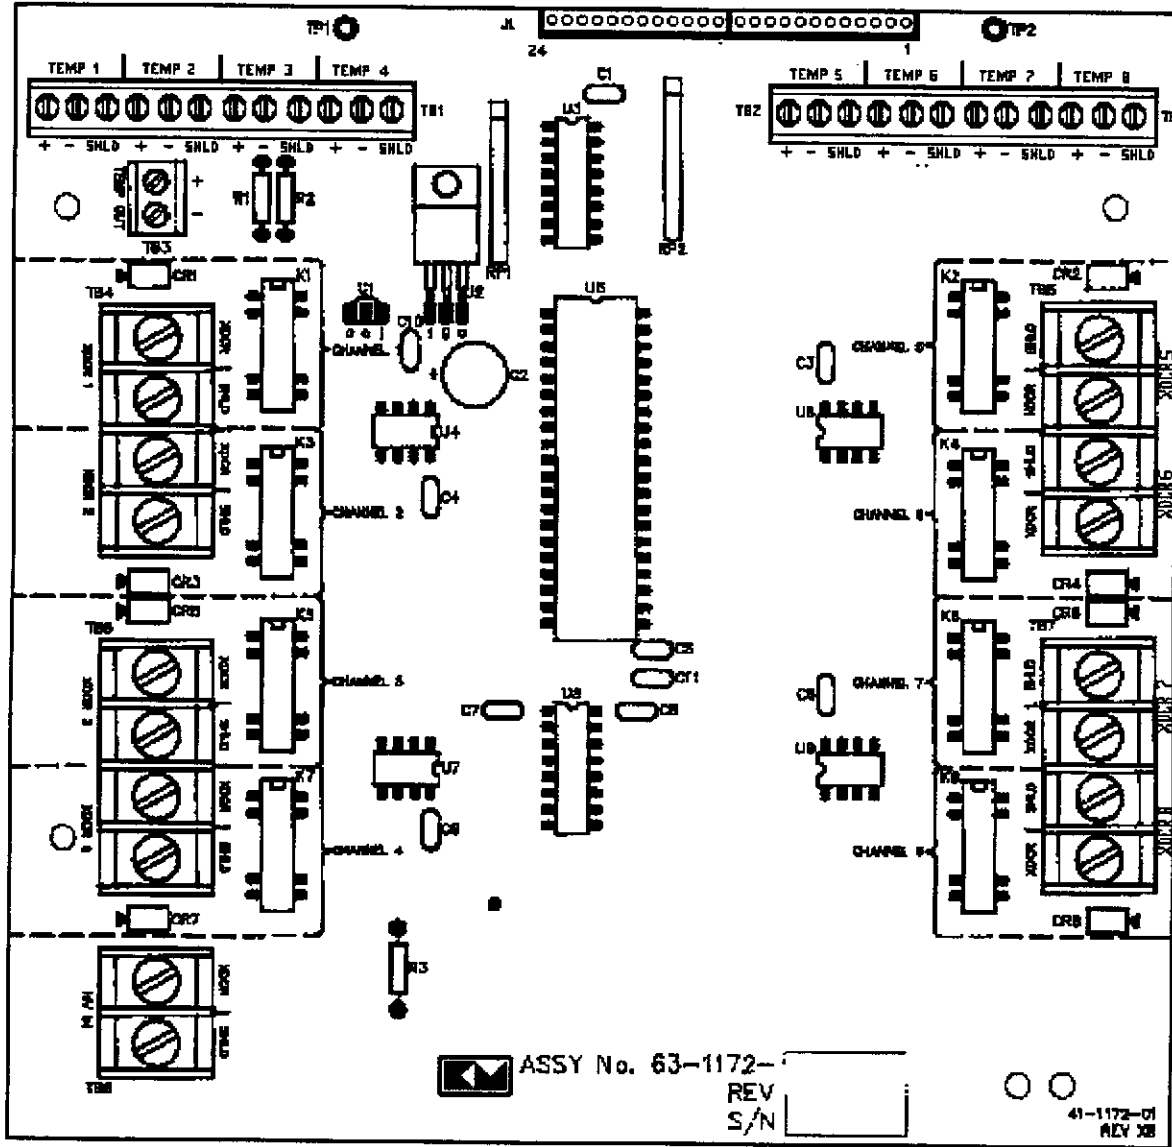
Assembly Drawing of the Sensor Switching Module Board, P/N 63-1172.
